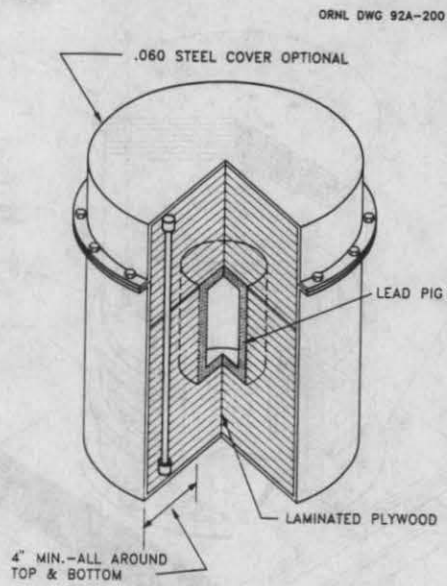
DOT-20WC-2—cutaway view of the small wood-insulated container with optional steel shell.
